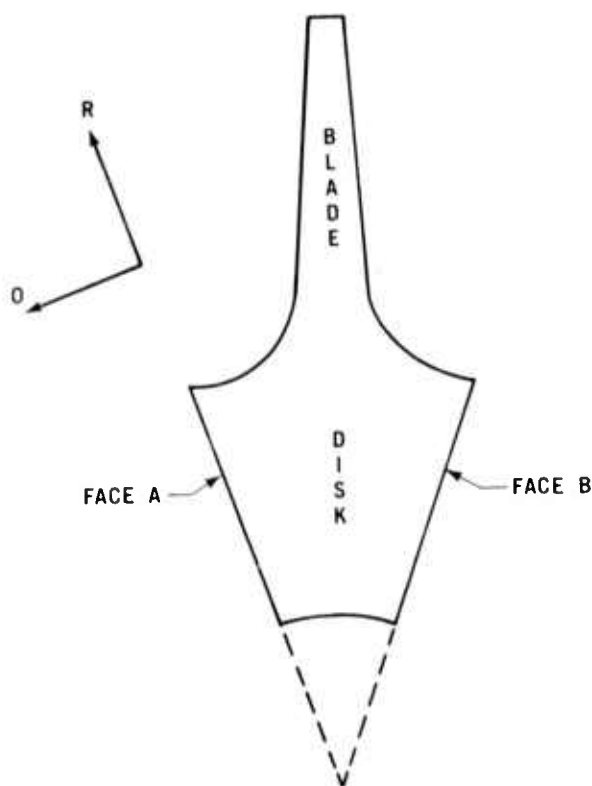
Sketch of Three Dimensional Rotor Model Parallel to Rotor Centerline
